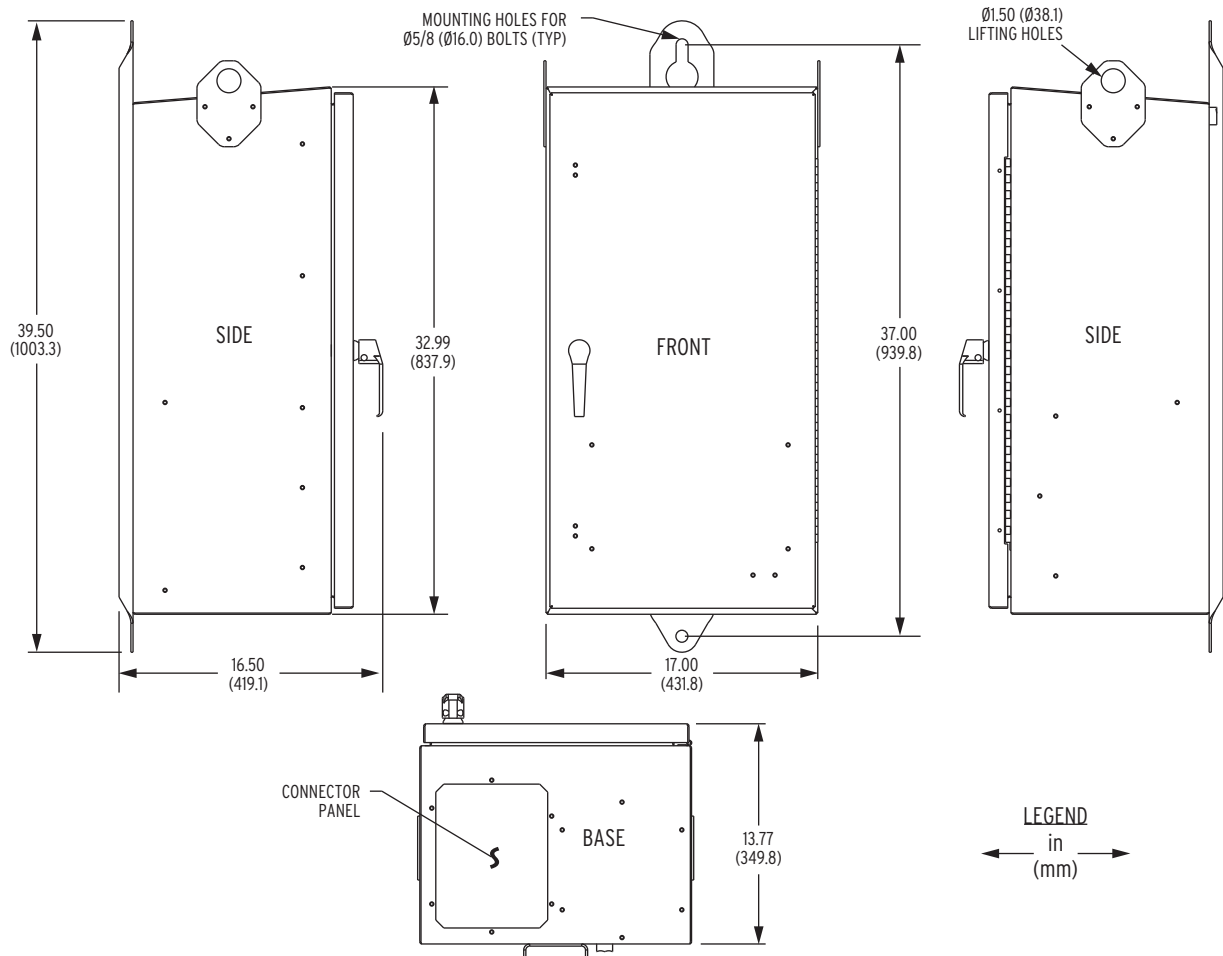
SEL-651R-2 Dimensions and Mounting Drill Plan (Single-Door Enclosure)
